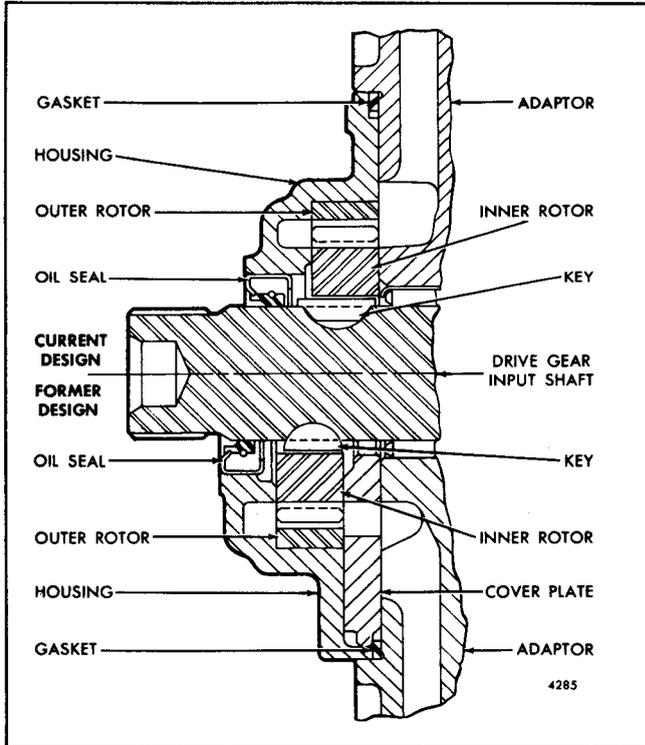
Current and Former Marine Gear Oil Pump Assemblies
